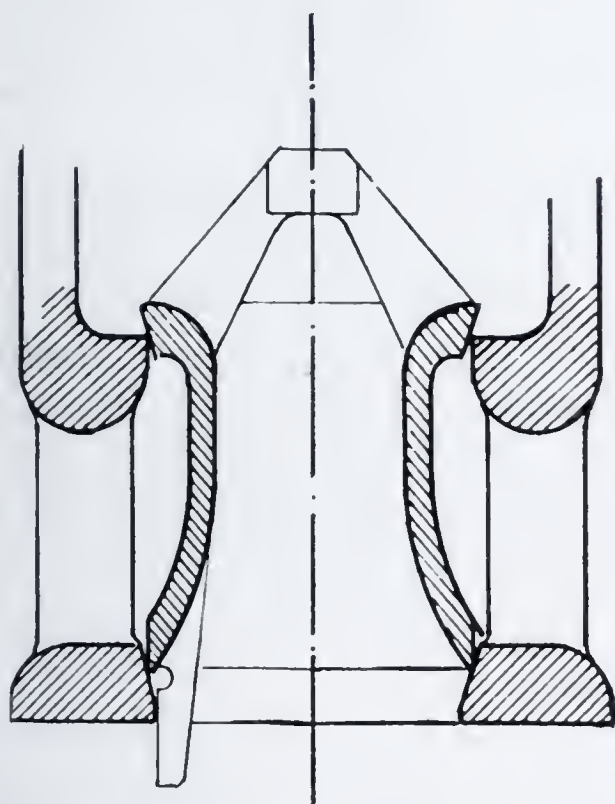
Section through Balanced Governor Valve without Split Seats.
